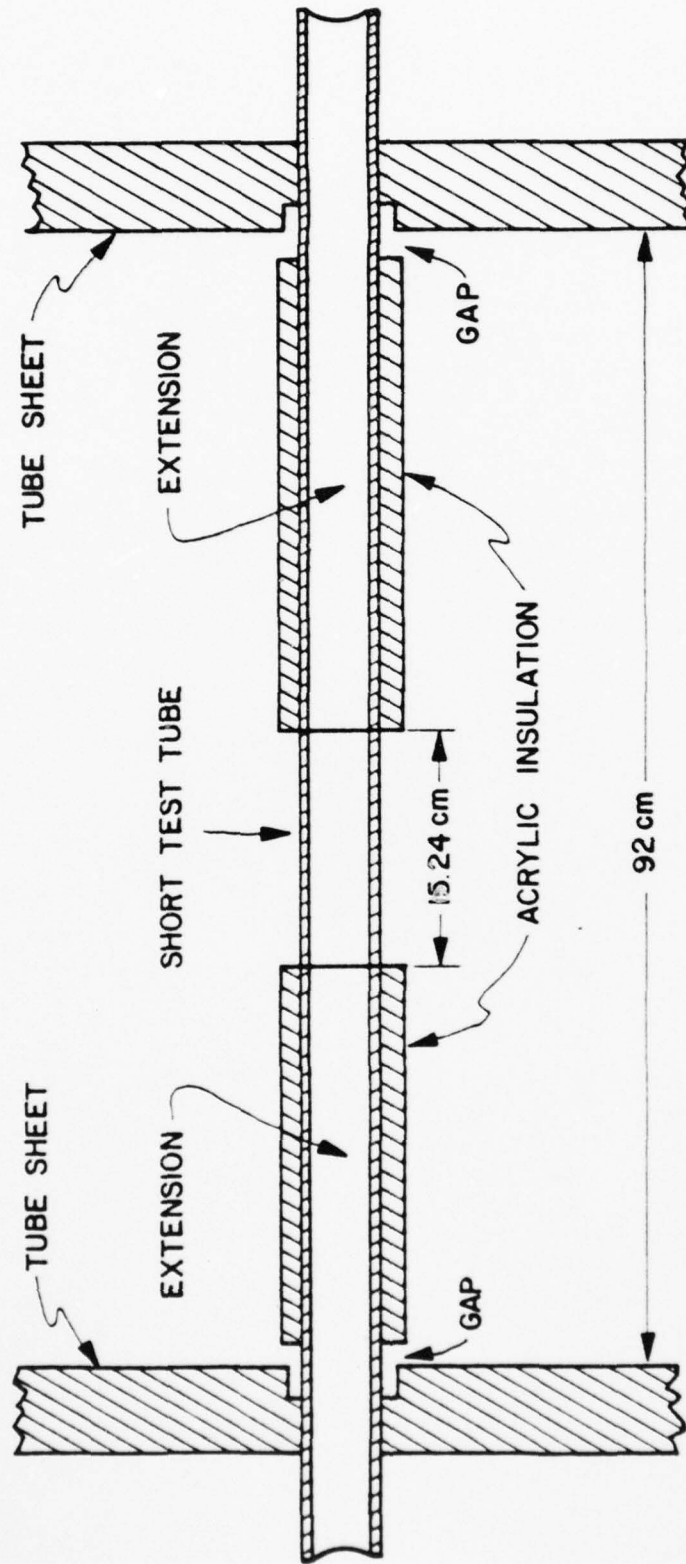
Diagram of short tube with insulated extensions inside test condenser without dummy tubes
